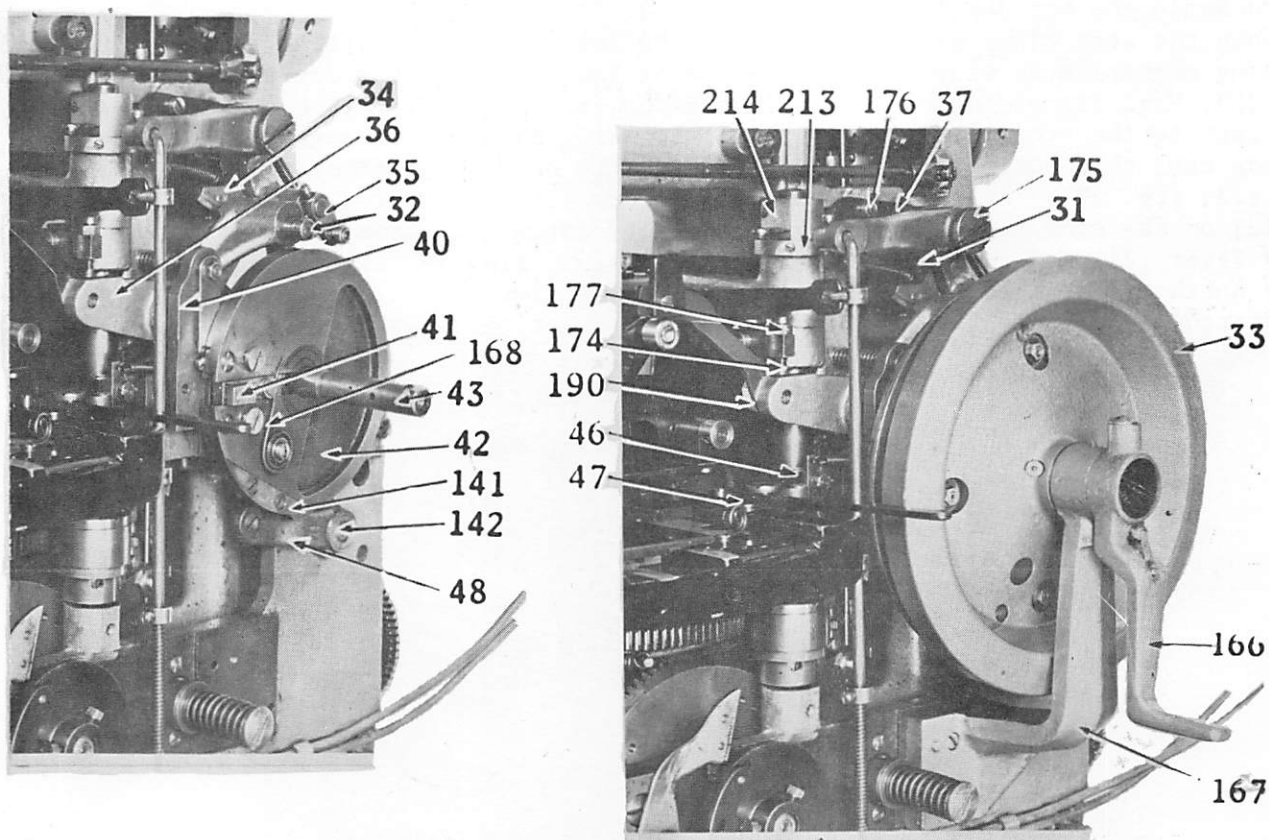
View of Buttonhole Cutter Pulley Showing Buttonhole Cutter Engaging Stud and Latch
